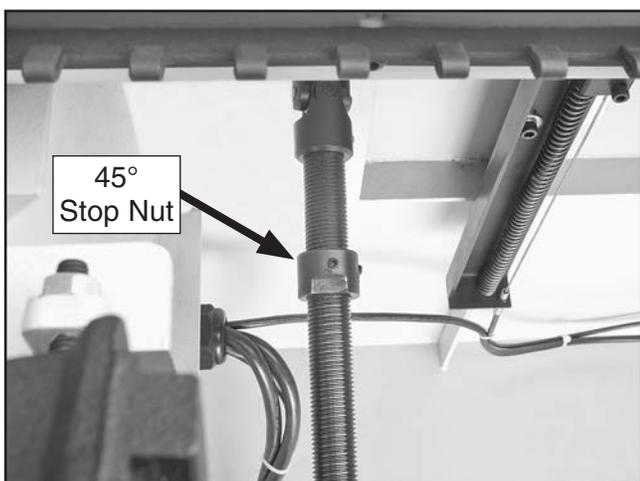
Tilt leadscrew 45° stop nut (viewed with main table removed for clarity).
